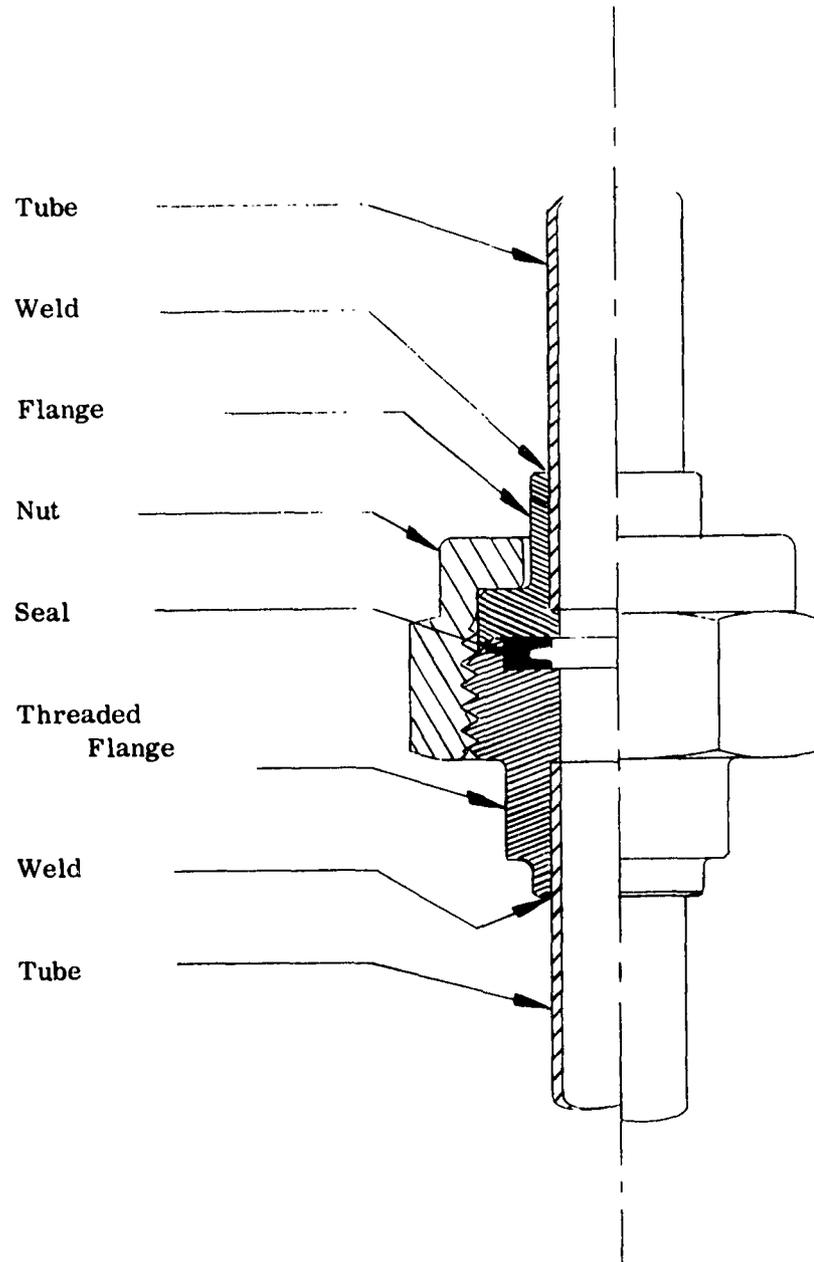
ASTRO-WEIGHT TUBE FITTING, ASSEMBLY DRAWING
